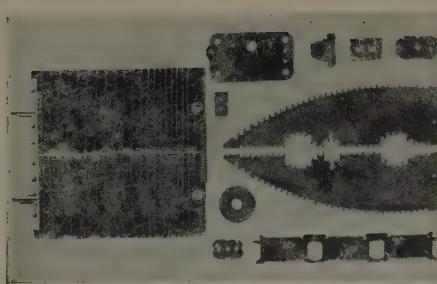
High heat mica punchings: (Left) Toaster element; (right bottom) machine gun punching; (right middle) flatiron core; (others) washers and terminal pieces
